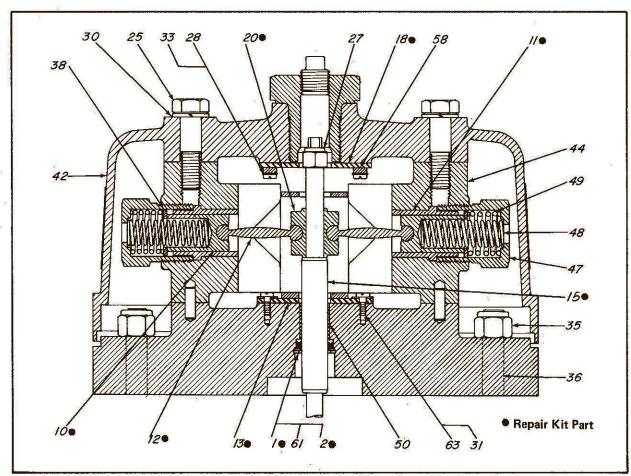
330400 and 330400-4 Air Motor Assembly Upper Section
